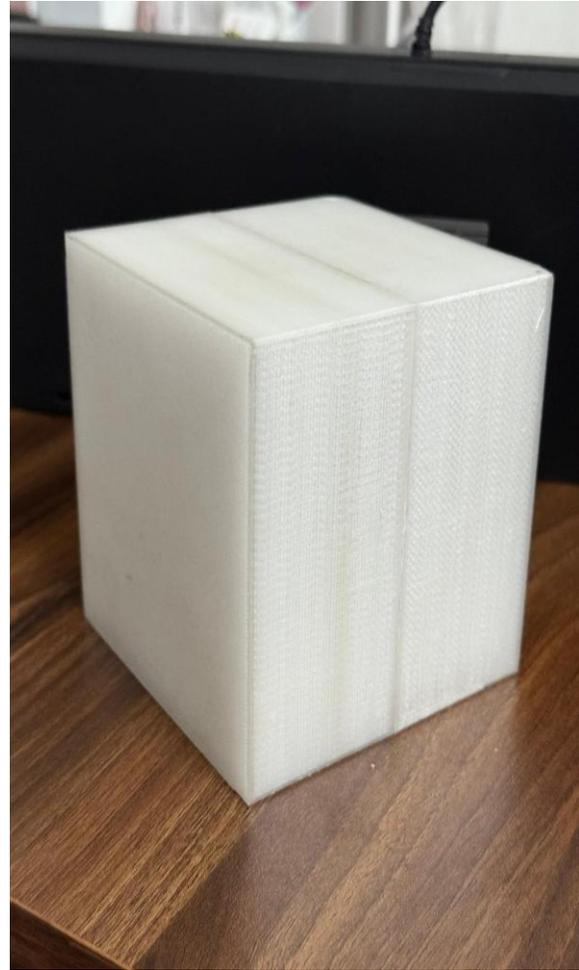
3D printed PETG mould block fabricated using FDM process prior to assembly.
